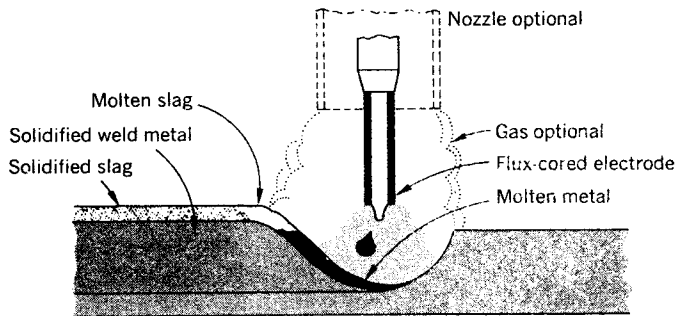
Flux-Cored Arc Welding, FCAW (1)
